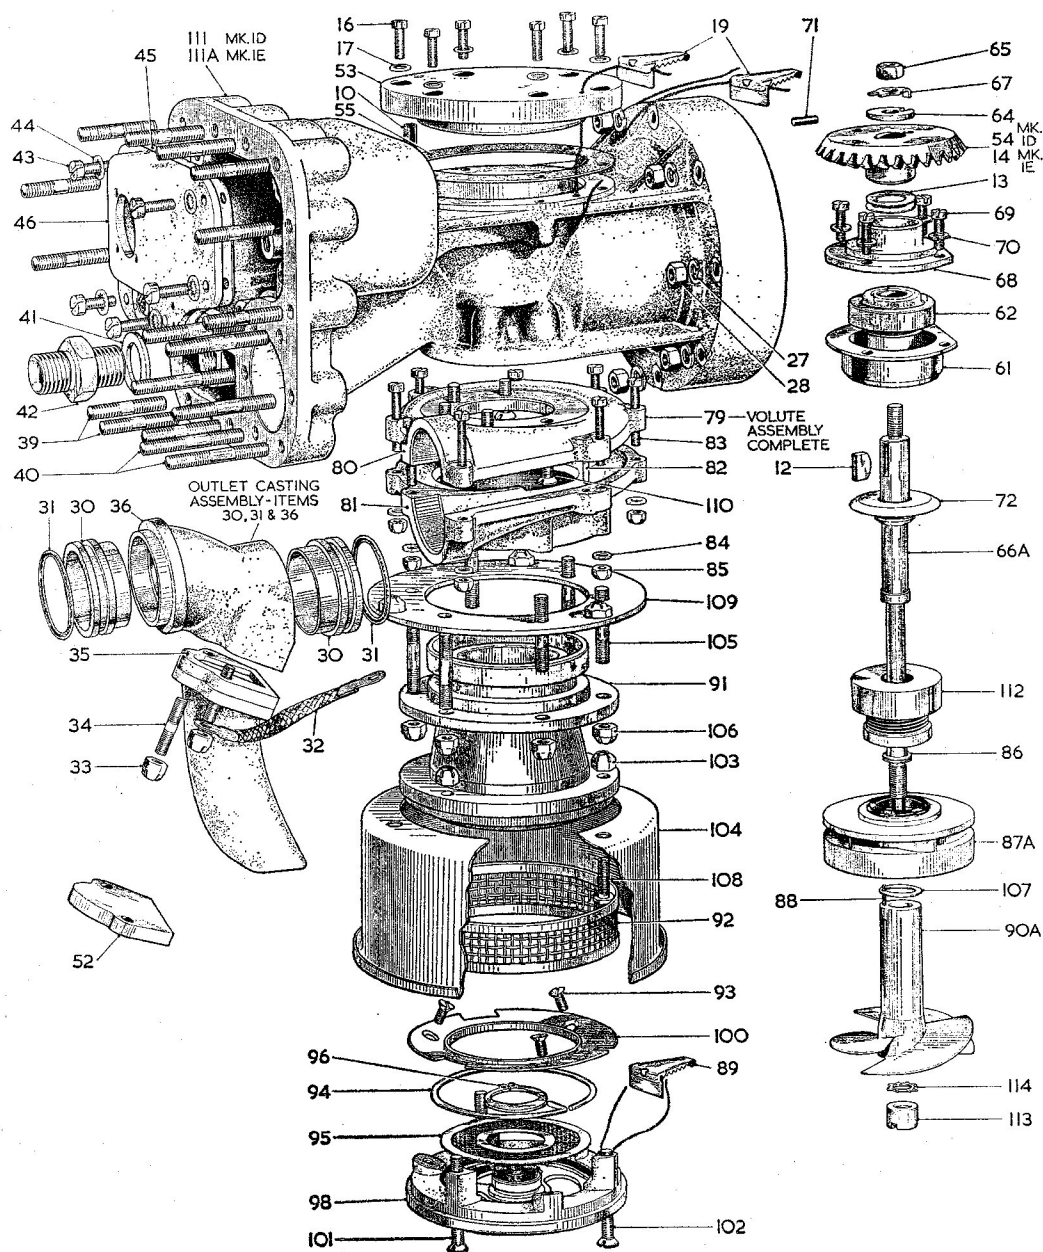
Exploded view of pump unit (SPE. 404 Mk. 1D and 1E)
